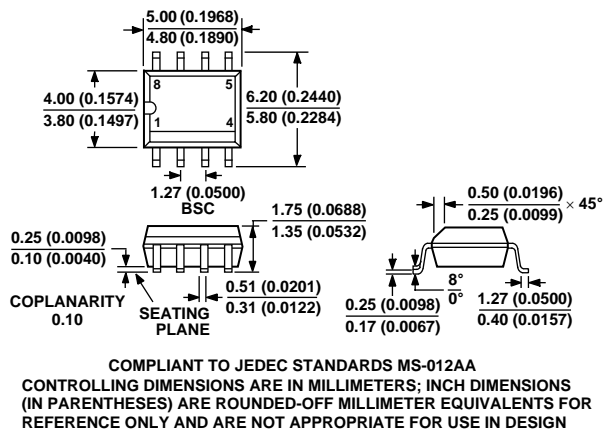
8-Lead Standard Small Outline Package [SOIC] Narrow Body (R-8)
